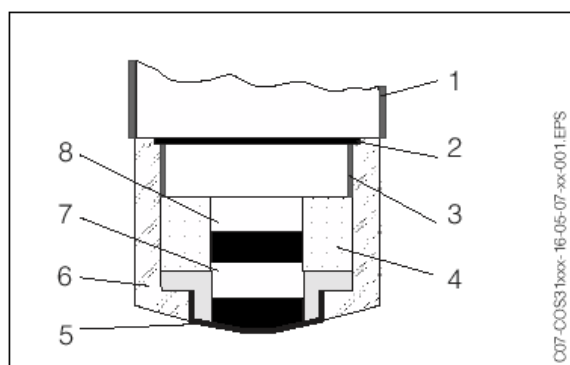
Sensor head with membrane cap (Side view with cut-away view of membrane cap)
